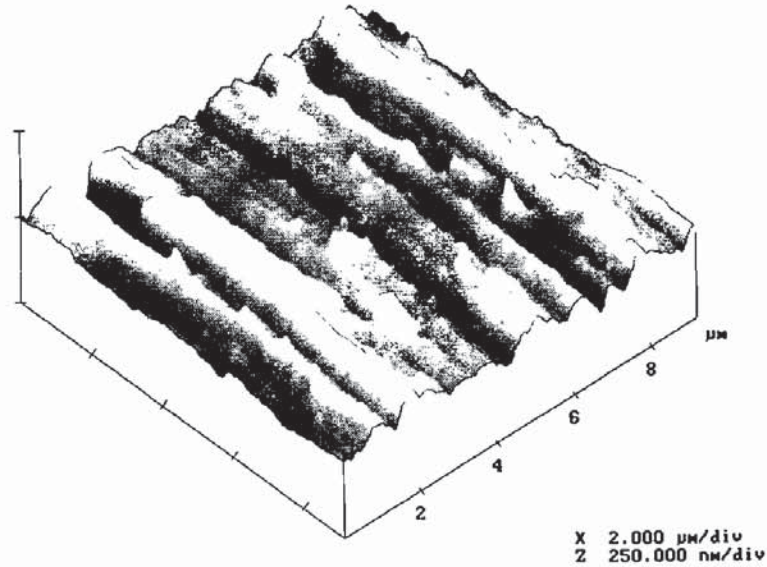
AFM scan of the as-machined A359/SiC/10p-HIP-T6 after ultraprecision machining with a poly-crystalline diamond tool. Facing at 20 m/min speed, 1 μm depth, 1.65 $\mu\text{m}/\text{rev}$ feed using PCD tool (0.5 μm grain, 0° rake, 0.33 mm radius, 500–750 nm sharpness).
